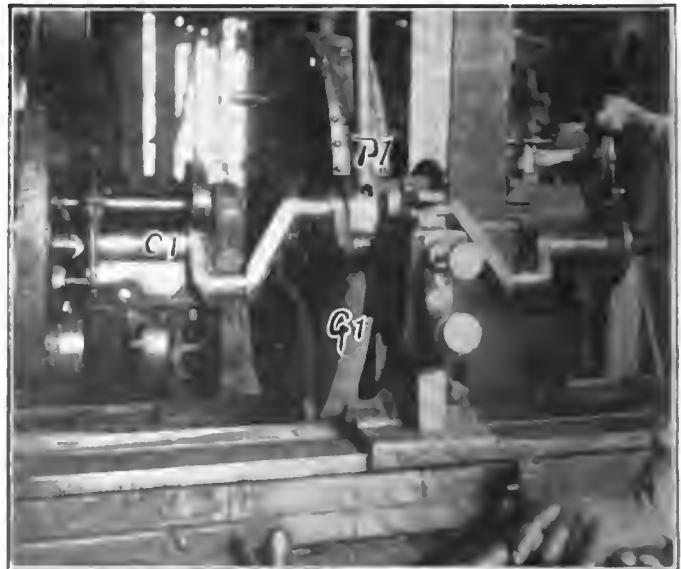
Landis Grinder in the Regal plant finishing crankshaft bearings to make them round and true
